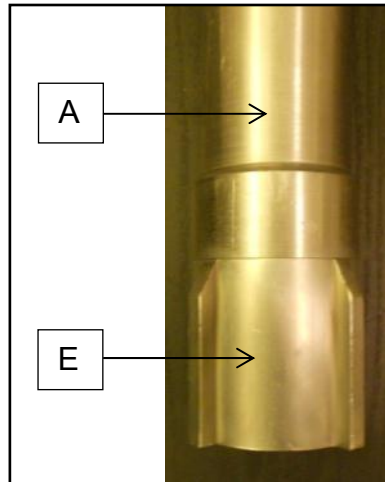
Probe assembly step 4 showing Part A attached to Part E
